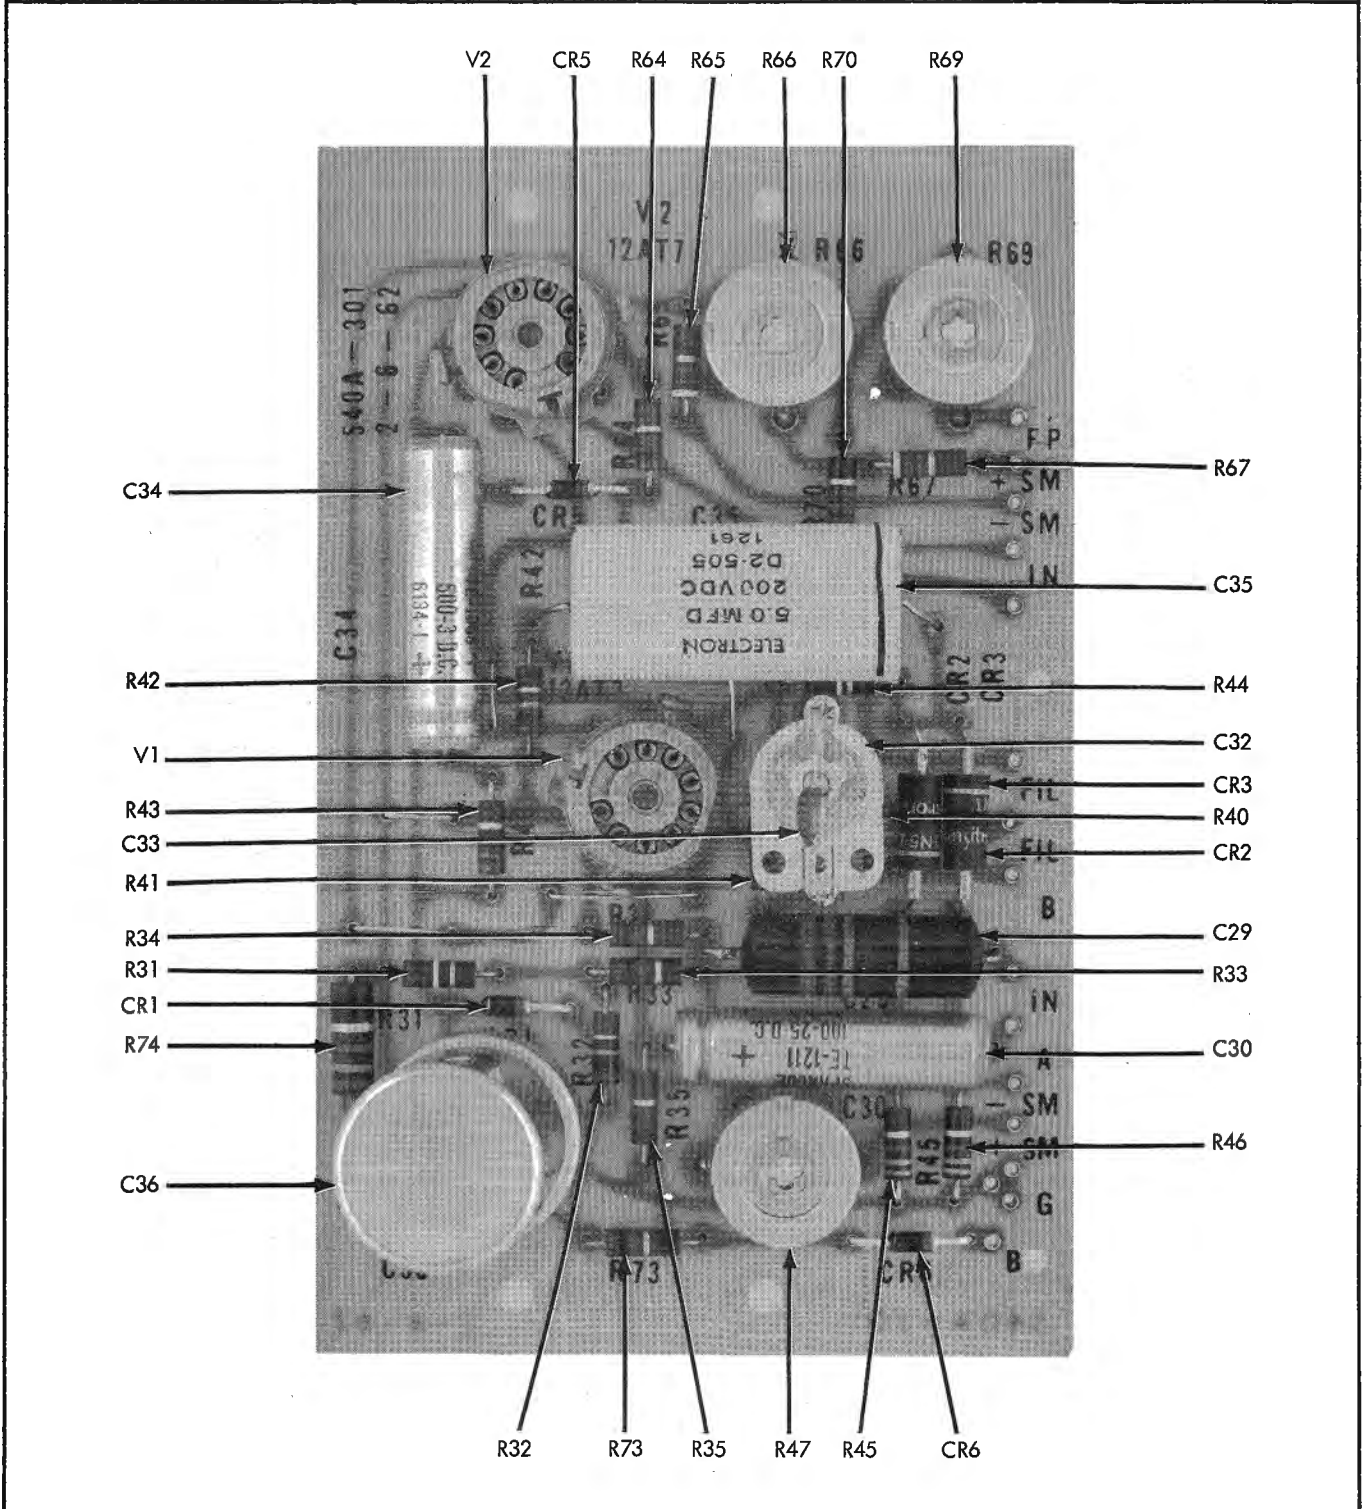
AMPLIFIER BOARD ASSEMBLY
